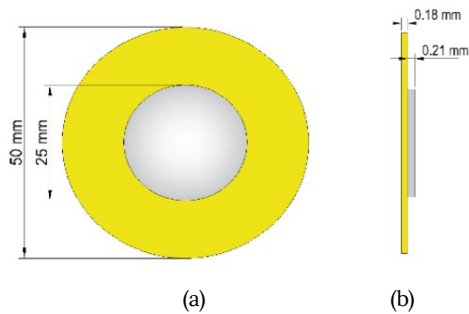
(a) Front view and (b) Cross-sectional view of the circular piezoelectric transducer.
